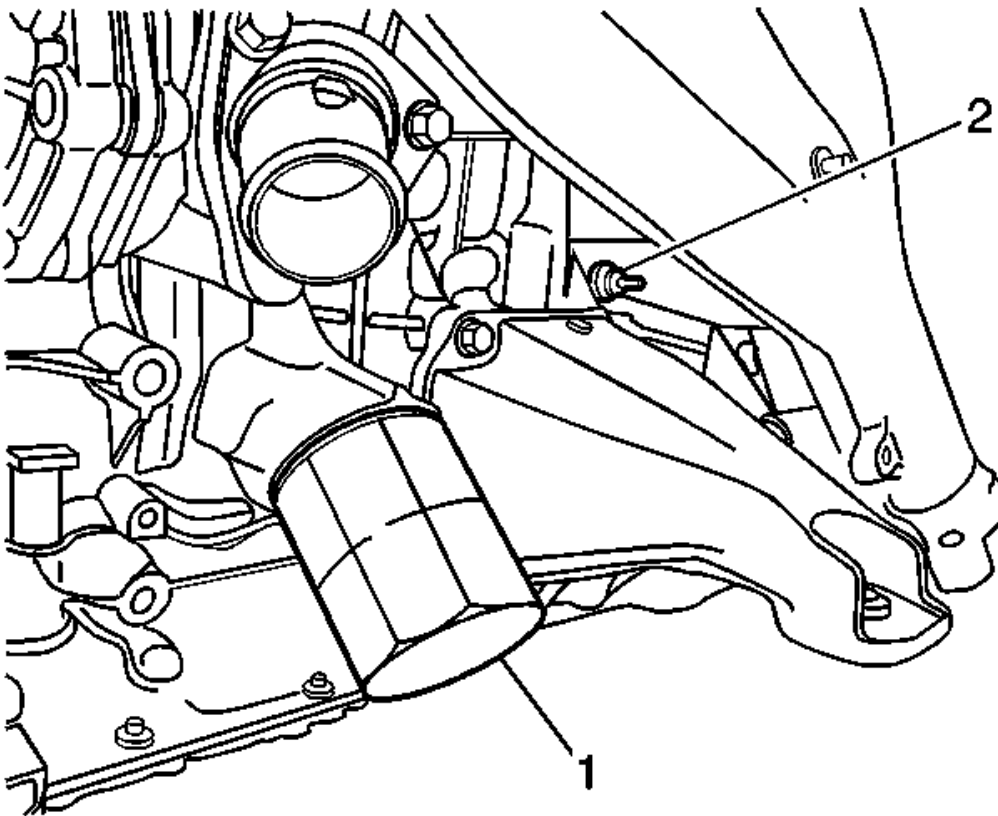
View Of Oil Pressure Switch & Oil Filter
